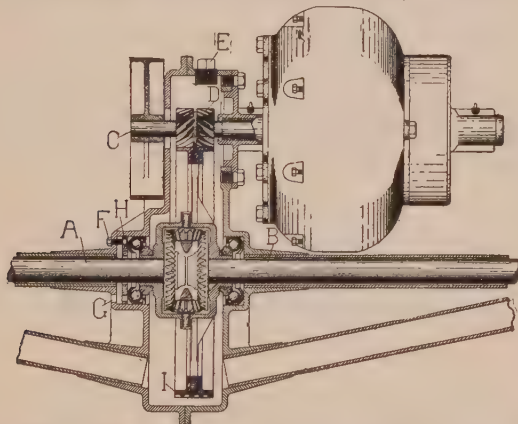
Diagram of a single motor attached to rear axle through "herringbone" single reducing gears. A, is the left hand section of the divided rear axle; B, the right hand section of the rear axle; C, the brake drum; D, the spiral pinion on the motor shaft driving the worm gear, I, on the differential; E, plug for greasing gears; F, set screw for locking ball race; G, slot for wrench to adjust threaded ring, H, against ball bearings.
